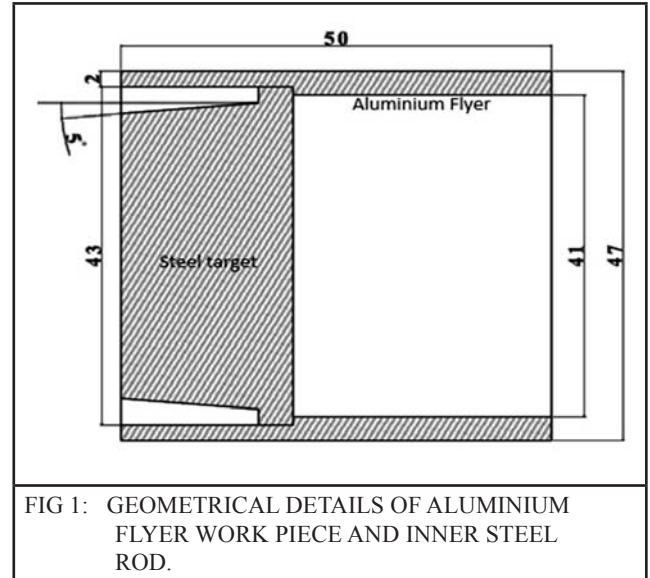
GEOMETRICAL DETAILS OF ALUMINIUM FLYER WORK PIECE AND INNER STEEL ROD.
